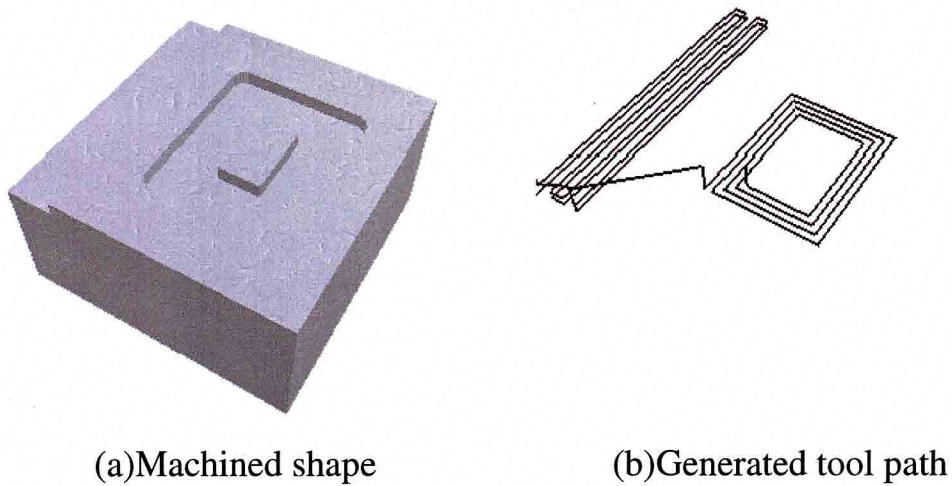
Output example of tool path for the product consisting of several machining feature
